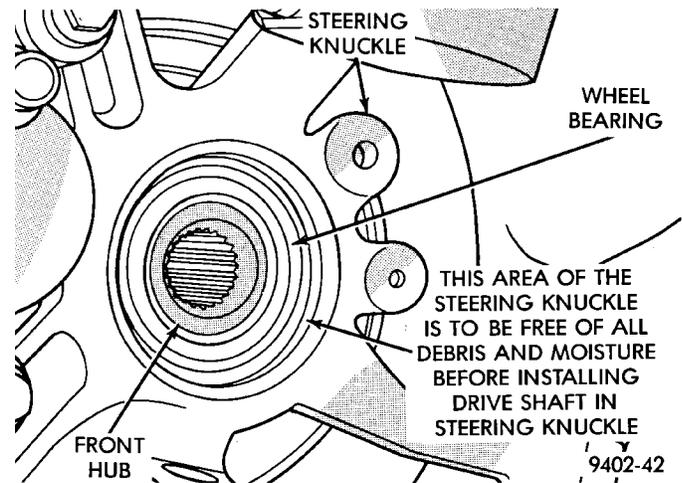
Steering Knuckle to C/V Joint Sealing Area
